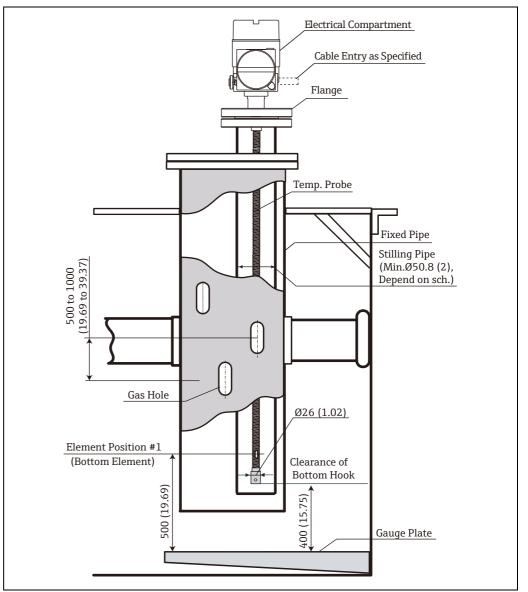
Stilling Well Method, Unit of Measurement: mm (in)
